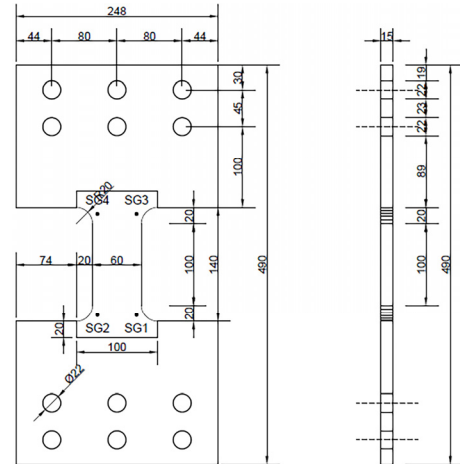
Details of test specimen and strain gauge location (Unit: mm)
